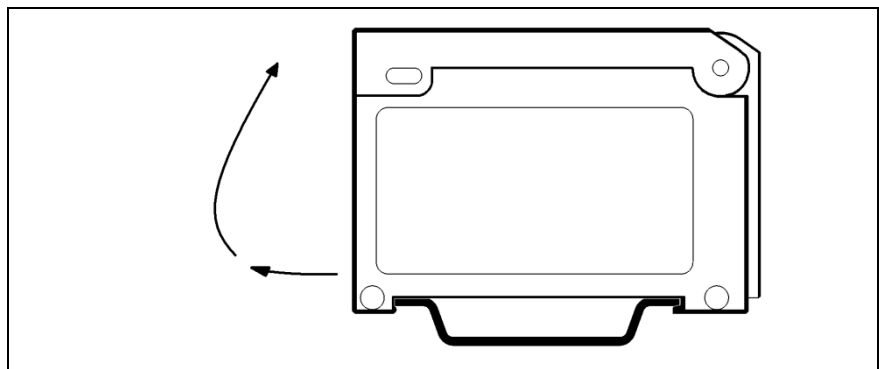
Alternative assembly of force/torque sensor system controller
